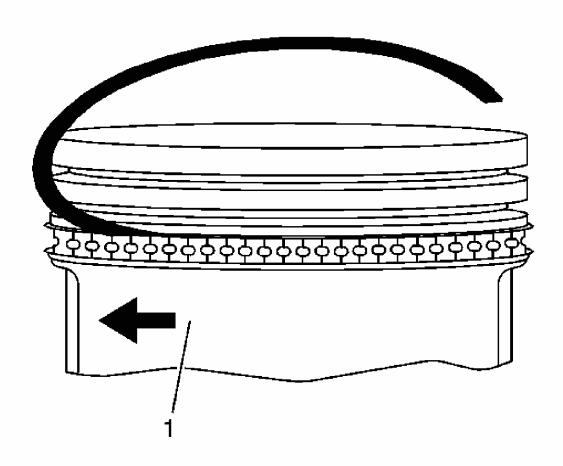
View Of Upper Oil Control Piston Ring Courtesy of GENERAL MOTORS CORP.
